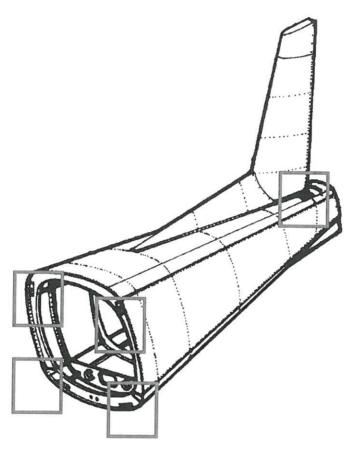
Fuselage rear part of the Z 242L aircraft with market areas for visual inspection check
